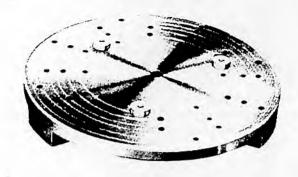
99 CLUTCH ASSEMBLY FIXTURE.
